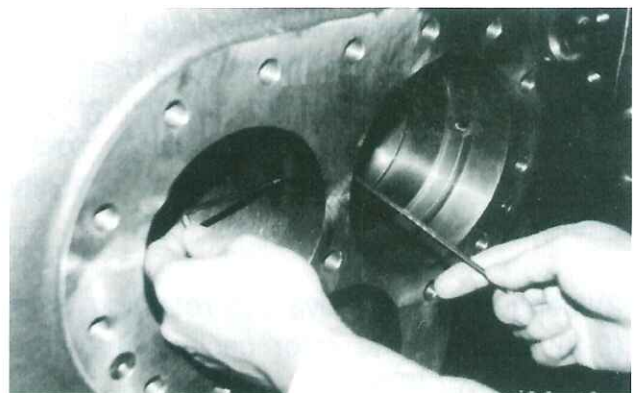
Removing Balance Piston Sleeve Lock Screws
